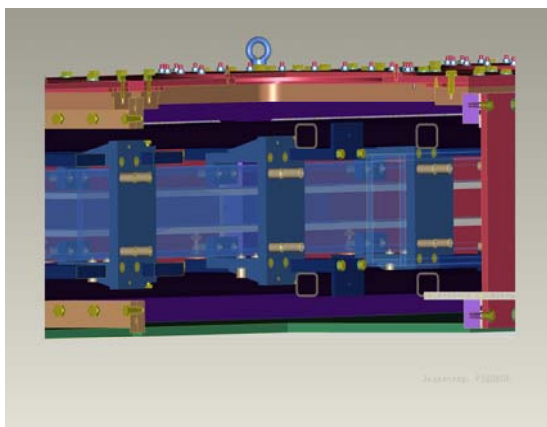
Positioning mechanism on a supporting frame of vacuum housing.
